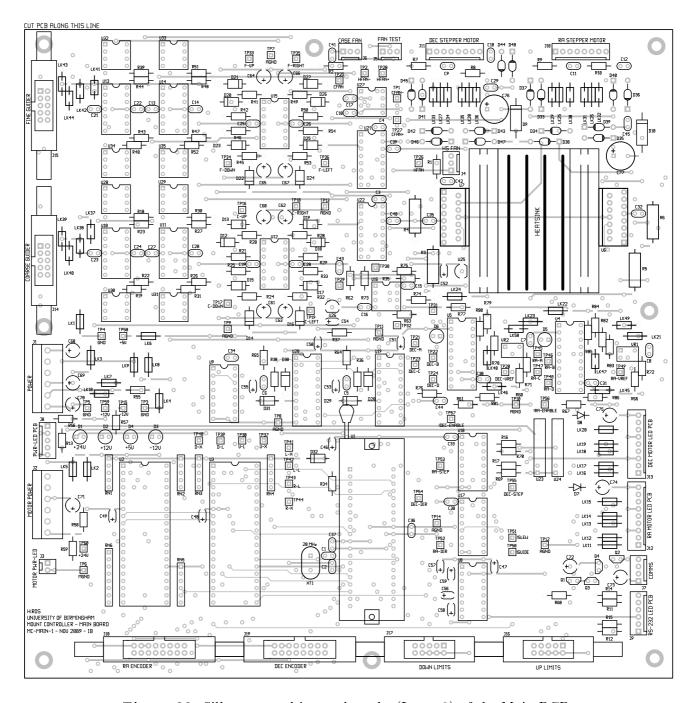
Silkscreen and internal tracks (Layer 3) of the Main PCB.
